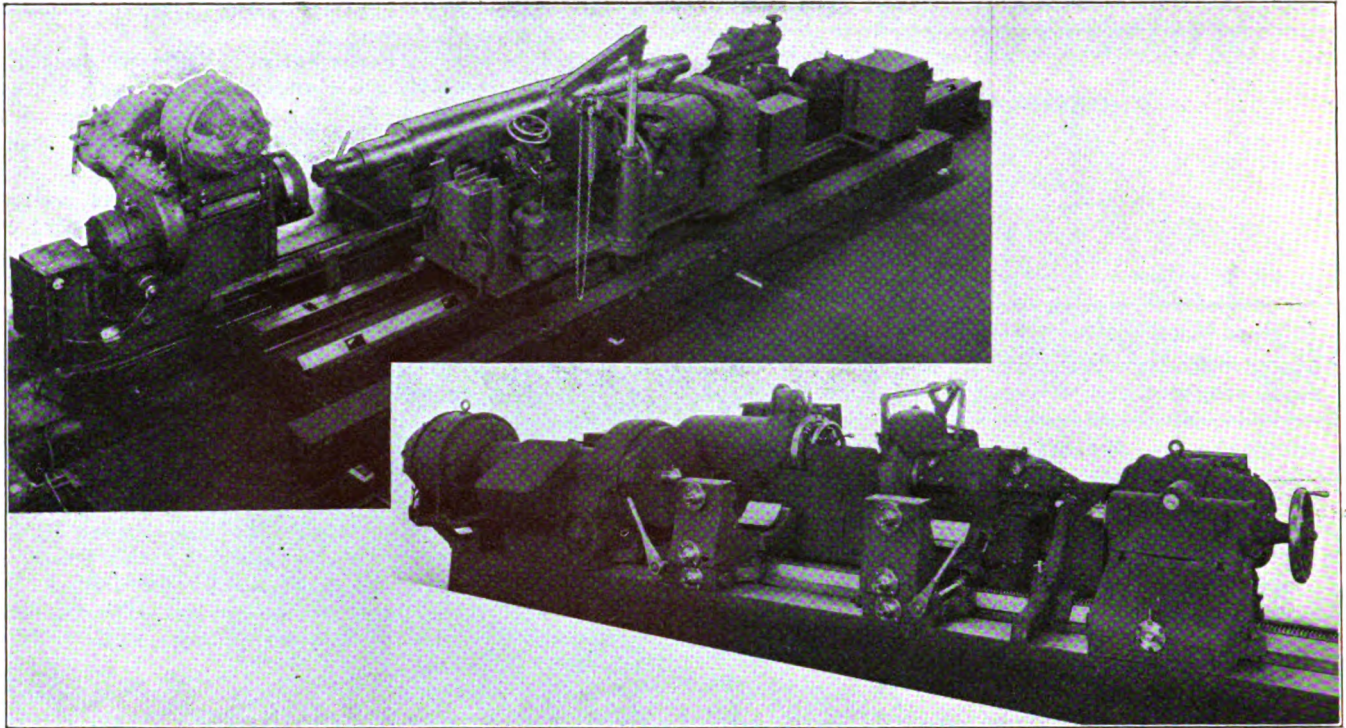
, (Upper)—View of the 54-in. x 21-ft. 0-in. roll grinding machine showing the general arrangement.
